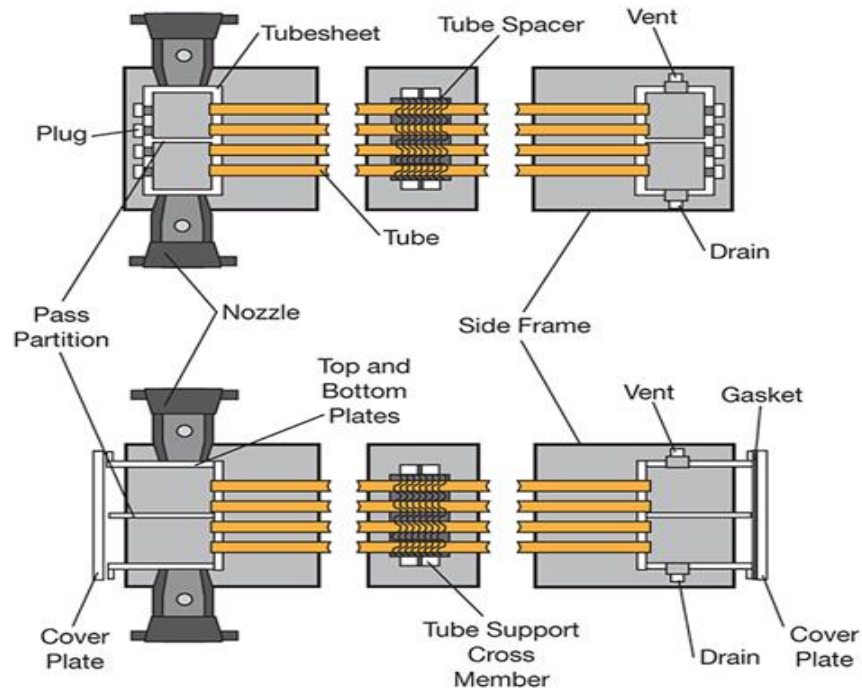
Tube bundles may be constructed with plug headers (top) or cover plate headers (bottom).
